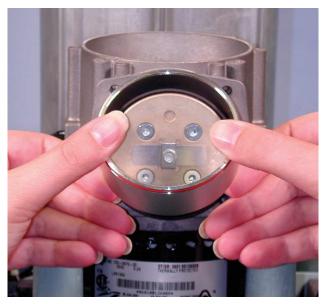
FIGURE O: INSTALLING THE CYLINDER SLEEVE
